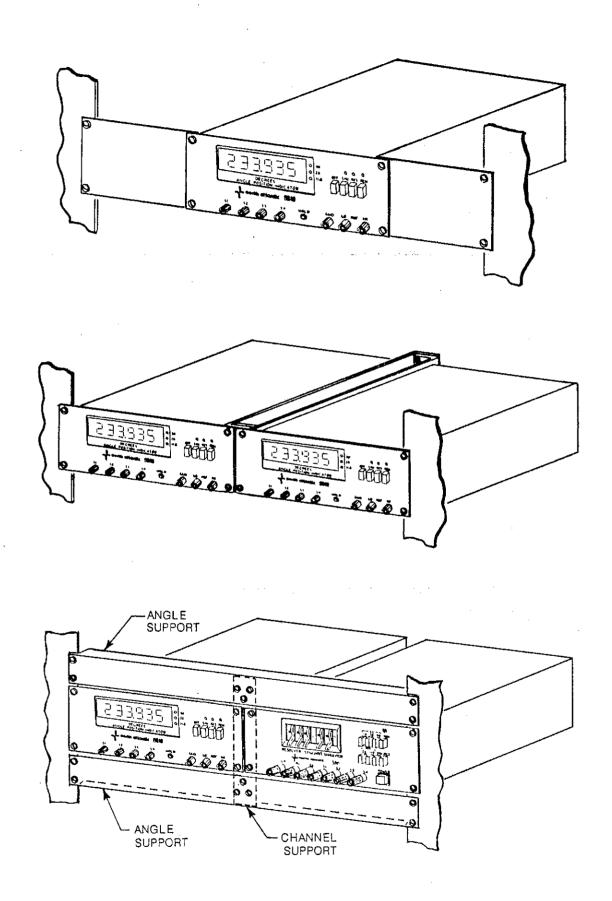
Full Rack and Tandem Rack Mounting Adapters
